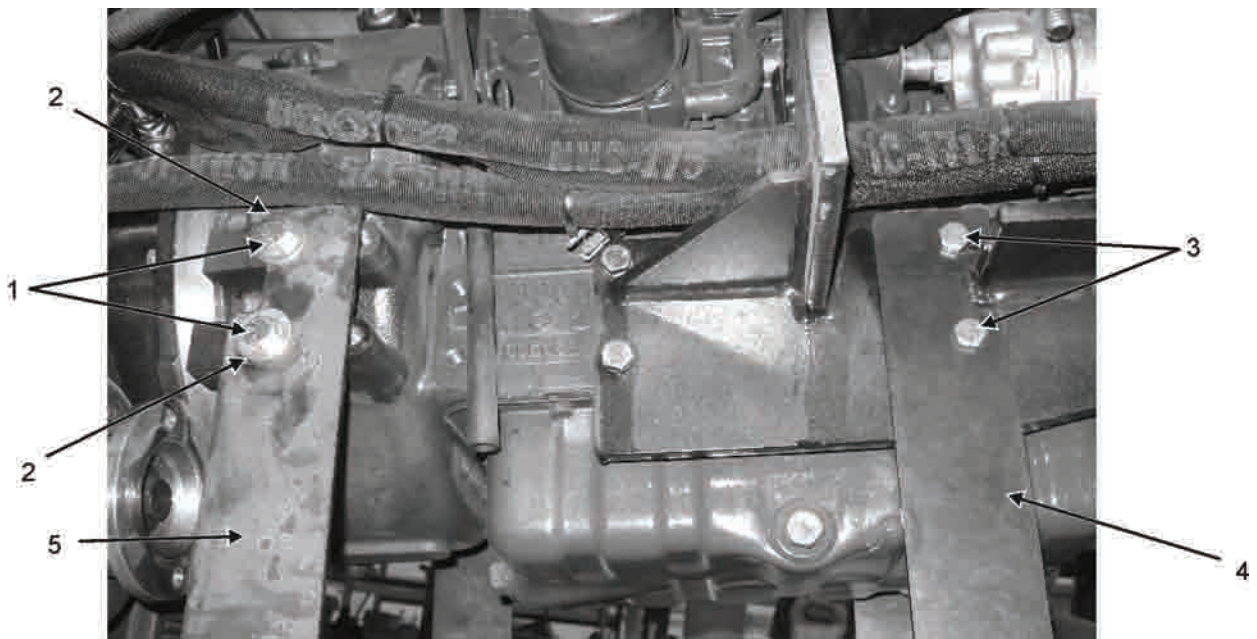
Engine Power Pack Maintenance Mounts RH, (Removal and Installation)
